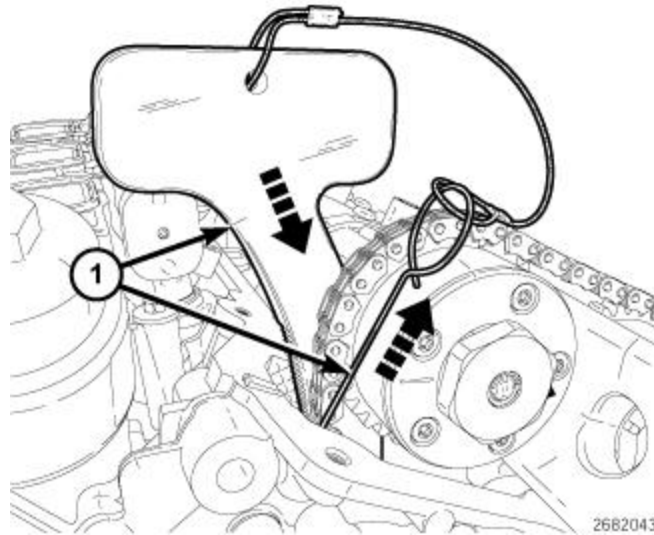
Positioning Timing Chain Holder To Force Rack & Piston Back Into Tensioner Body
